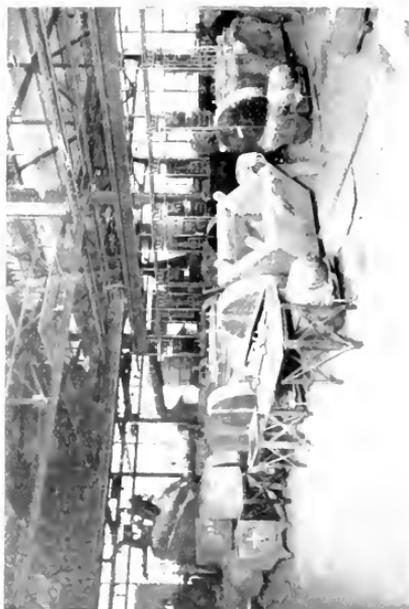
Sherardizing Ovens, Building No. 89, Schenectady Works
